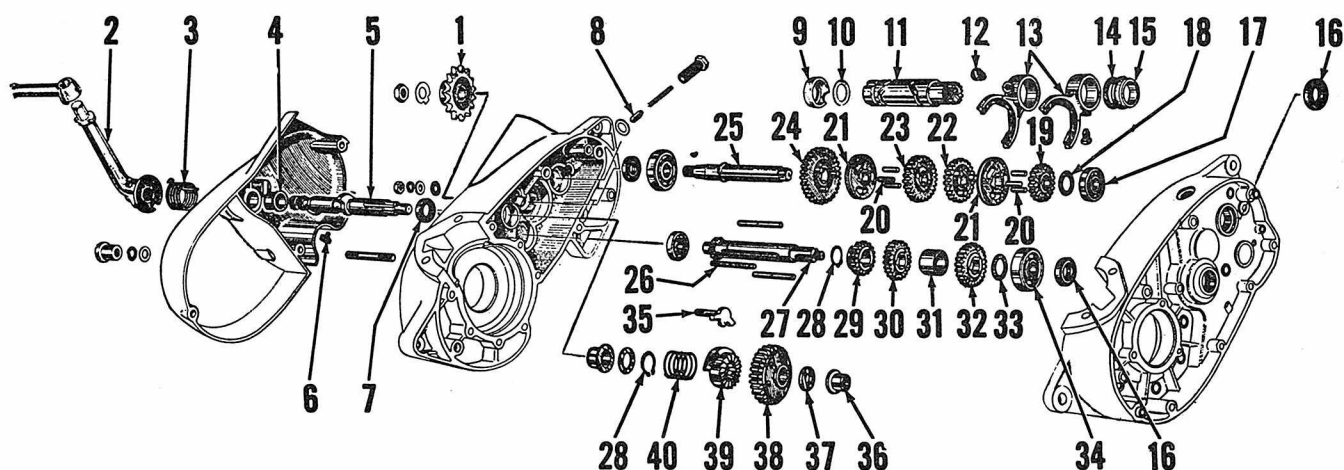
Exploded view of transmission assembly. Shift forks (13) are interchangeable.
